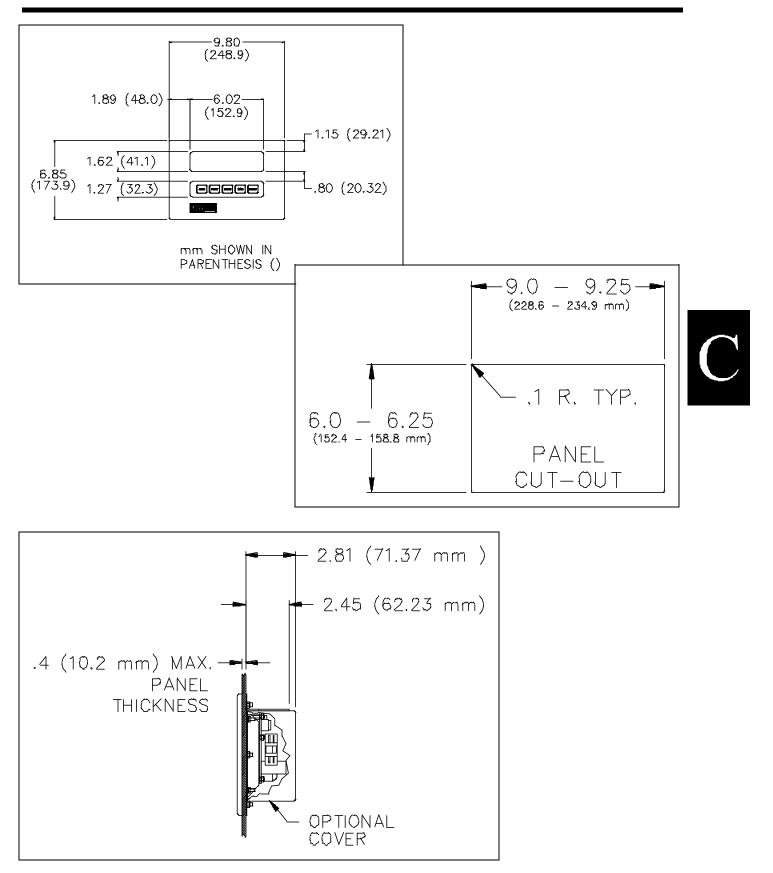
Model 450 Panel mount version cut out and mounting dimensions
